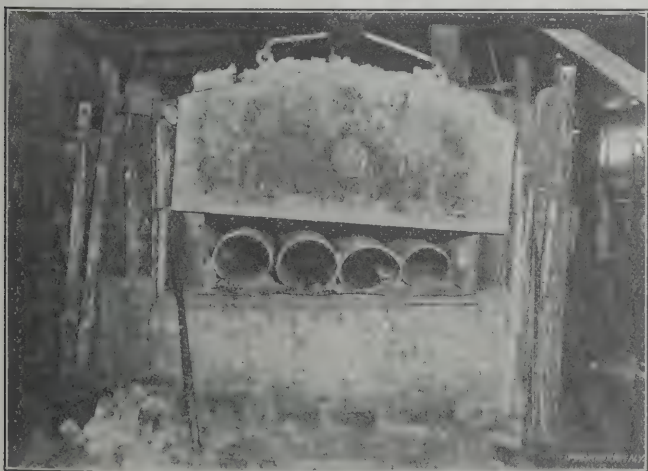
One of the Annealing Furnaces, showing the Pipes into which the Tool-steel Bars are placed while being heated for annealing
